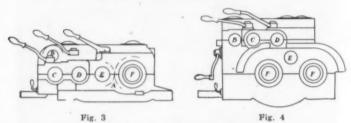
End Elevation of 3-in. Headstock Fig. 4 End Elevation of Double-Spindle Headstock
